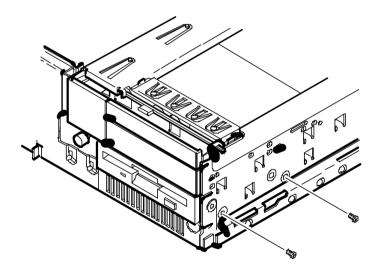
10 Removing the 31/2-inch Diskette Drive
